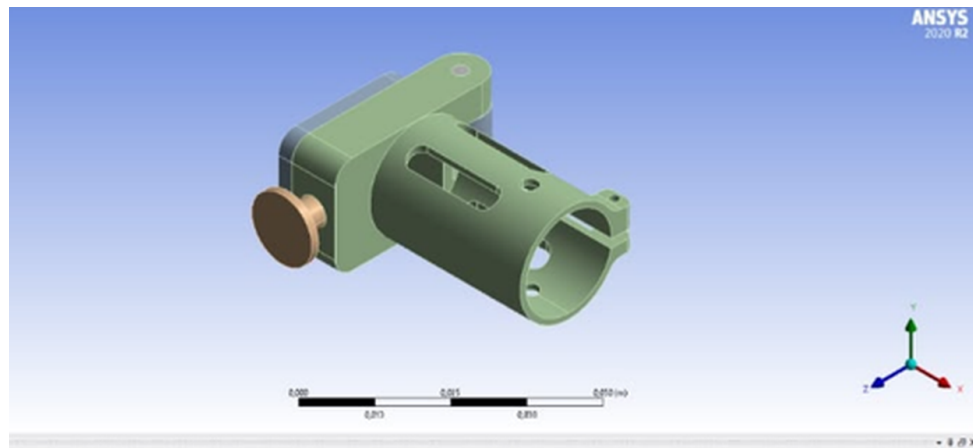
The in-house motor mount CAD model. The circular face carries the motor bolt pattern, while the cylindrical interface connects the mount to the 20 mm carbon-fiber tube.
